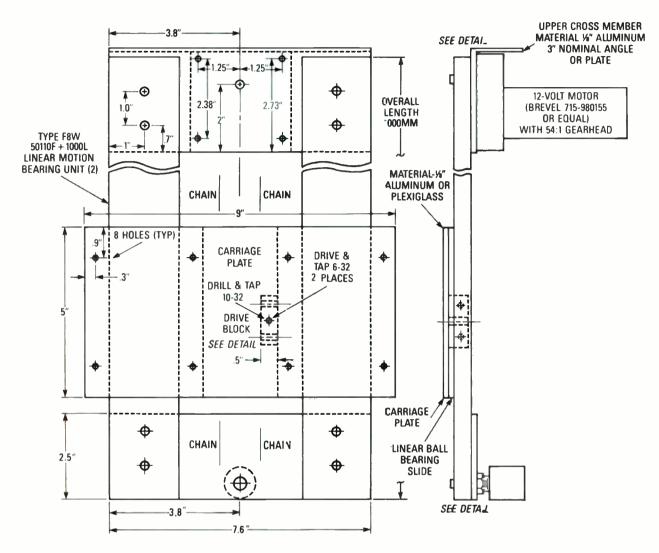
THE ROBOT ARM can be fabricated using the mechanical drawings shown here.
